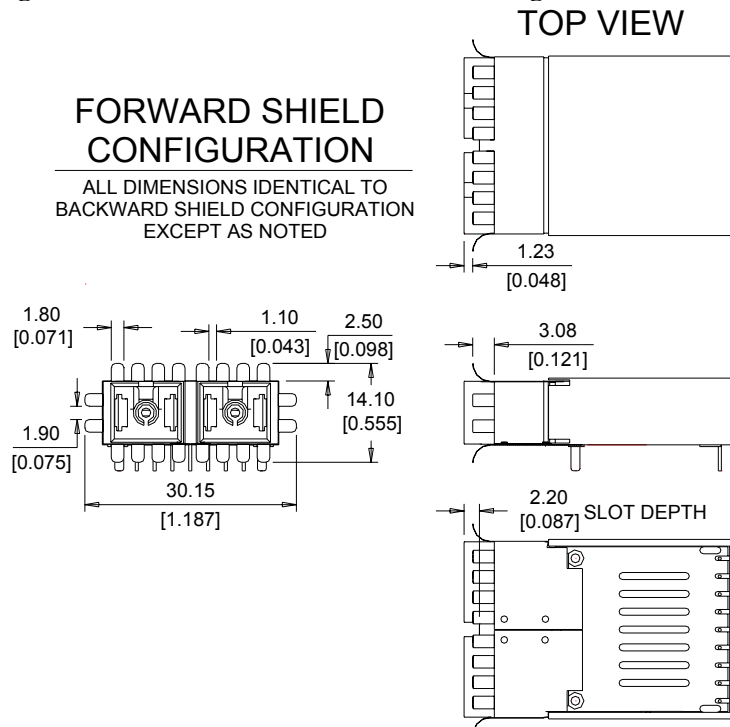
B – Forward Shield Module Package Dimensions in mm and [inches].
